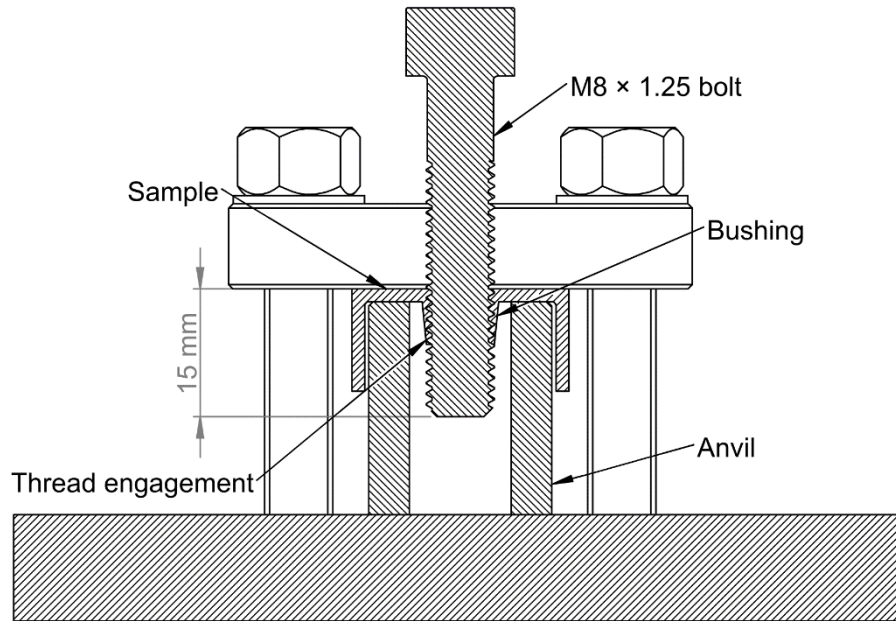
Cross-section of the work holding fixture with sample and load bolt in situ.
